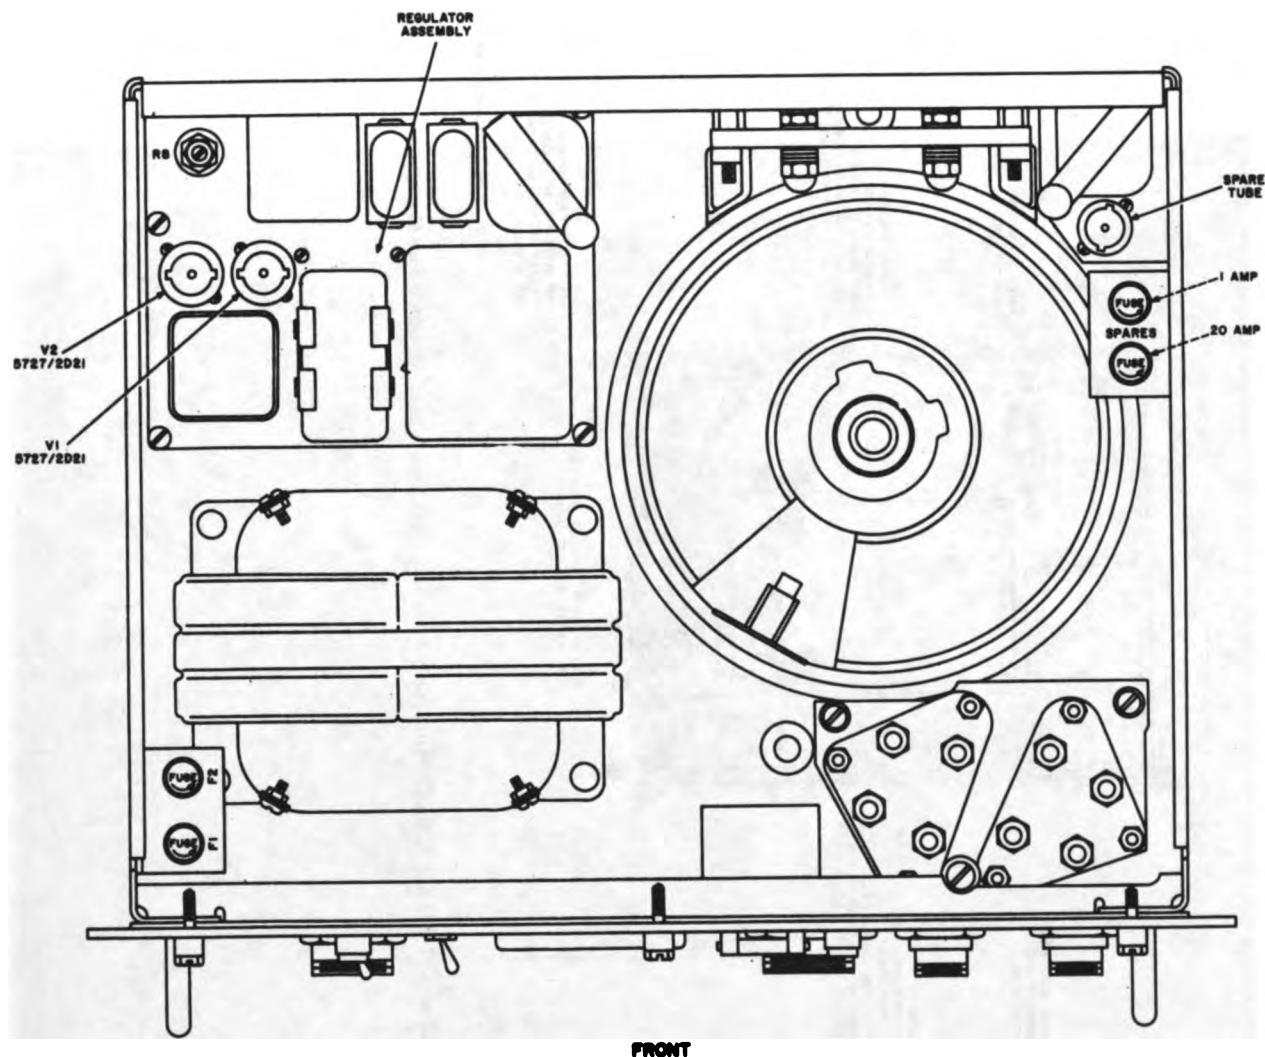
CN-514/GRC, top view, tube, fuses, and regulator assembly locations.
